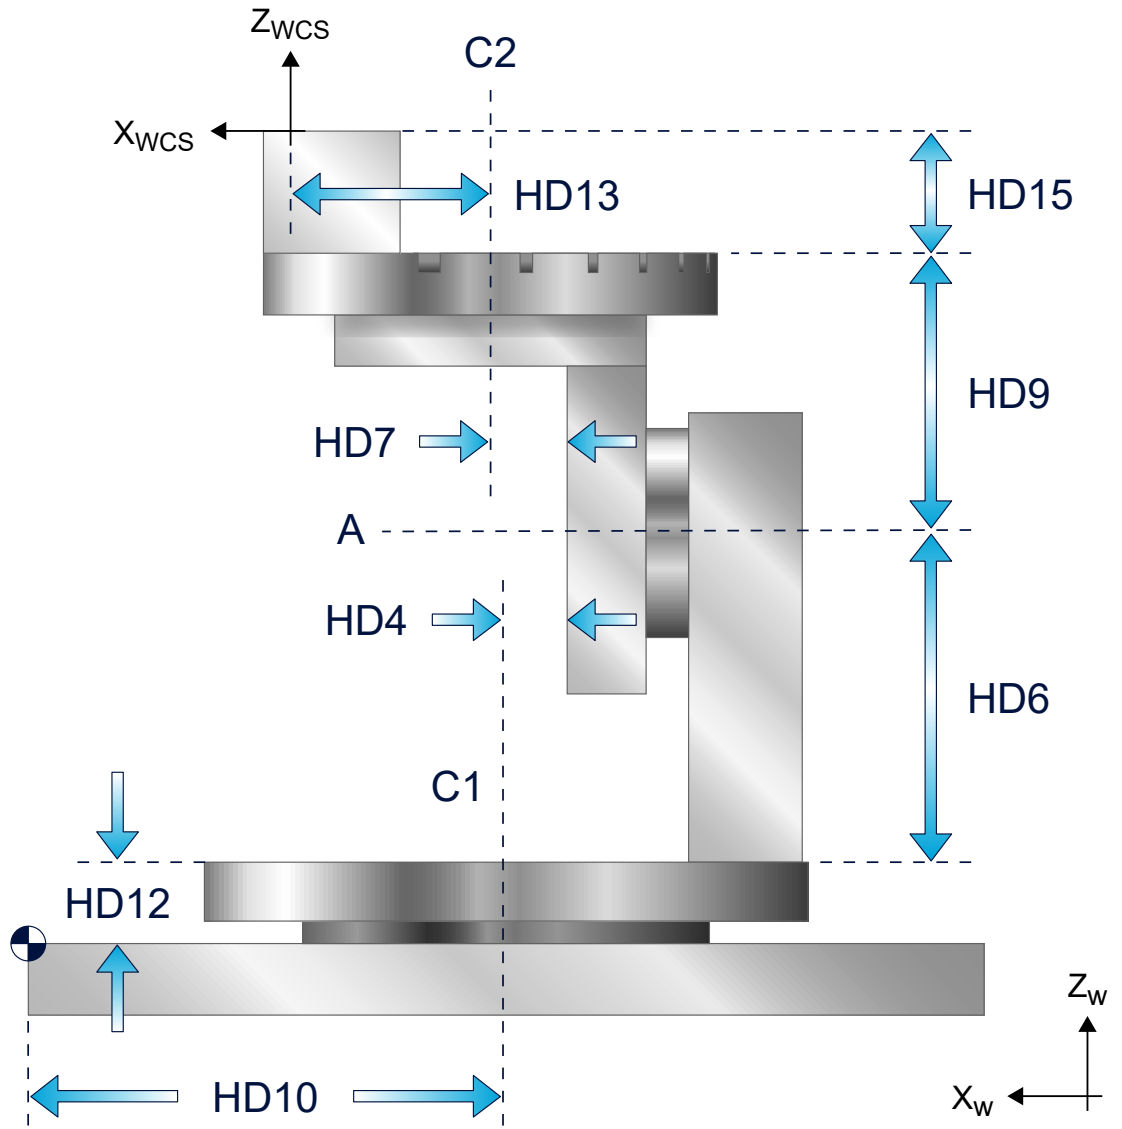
Parameters of CAC workpiece table in X/Z representation
